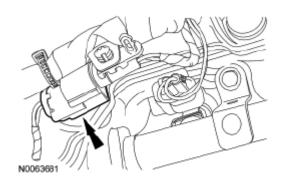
Locating Cylinder Head Temperature Sensor Electrical Connector Courtesy of FORD MOTOR CO.
